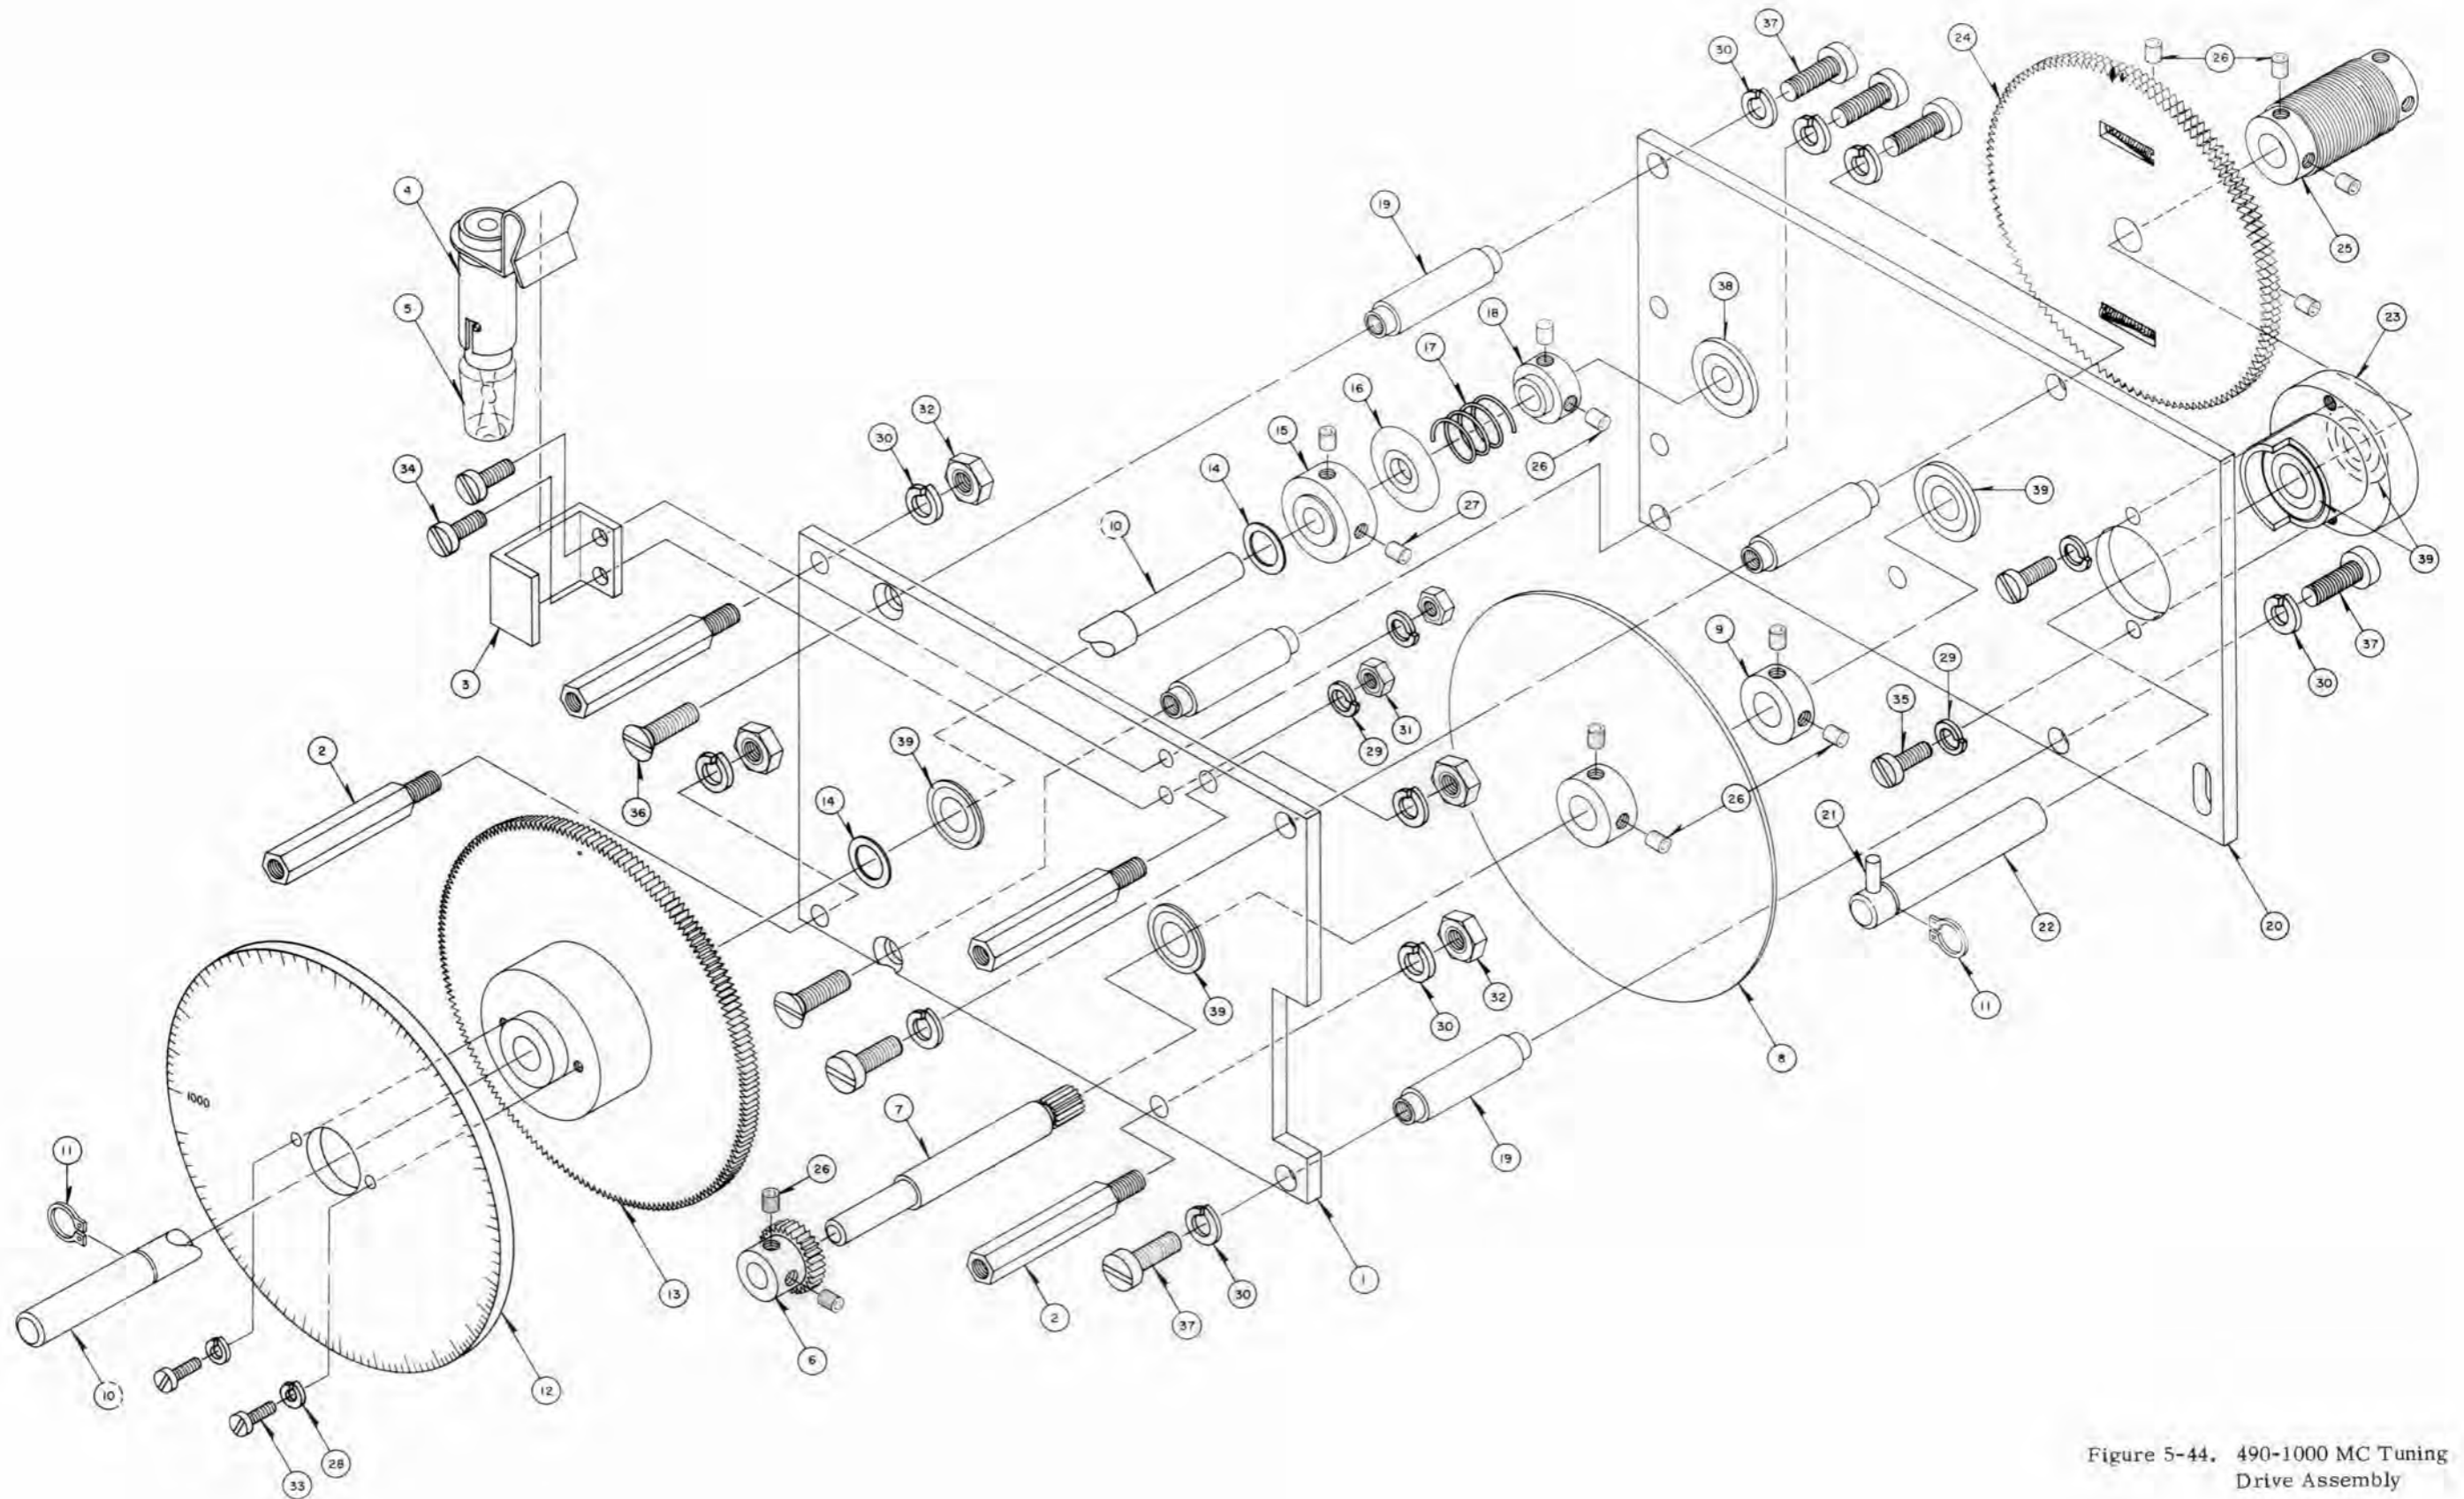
490-1000 MC Tuning Drive Assembly
